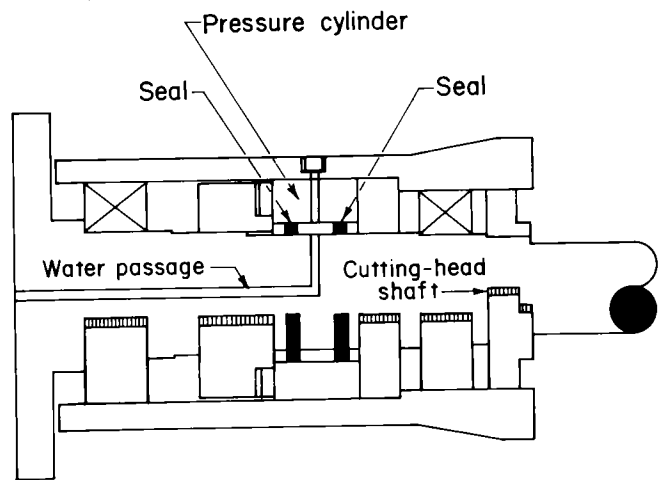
Cutting-head shaft showing location of rotary seals.
